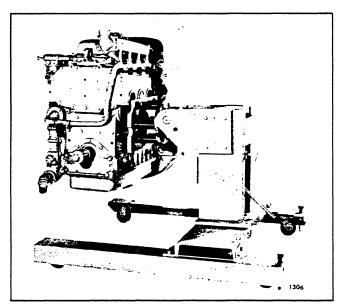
Engine Mounted on Overhaul Stand (J 6837-C) and Adaptor (J 8196)
